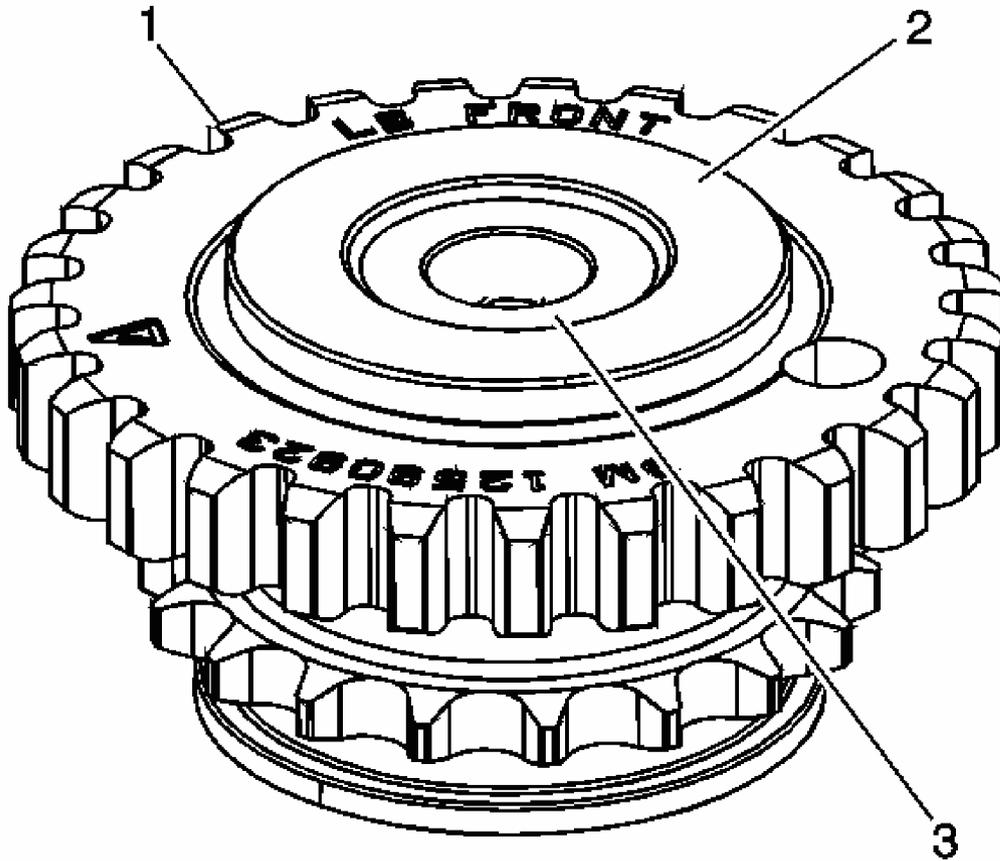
Checking Front Of Left Intermediate Sprocket Inspection Areas
